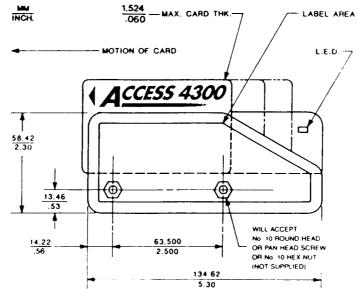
B: ACCESS 4300 MOUNTING DIMENSIONS
